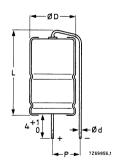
Style 3; see Table 1c for dimensions d, D, L and P.
